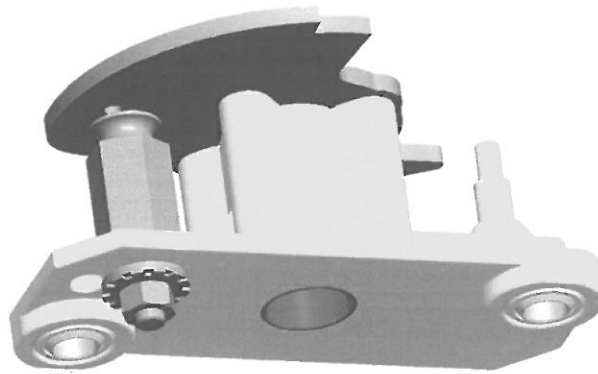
P/N 50530211-02 Mechanically Fastened Teeter Lever Assembly without Resilient Lock
